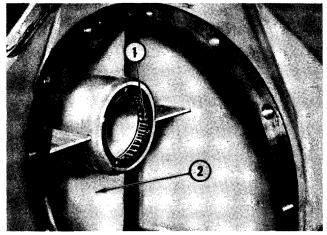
BEARING IN POSITION 1. Bearing 2. Case
